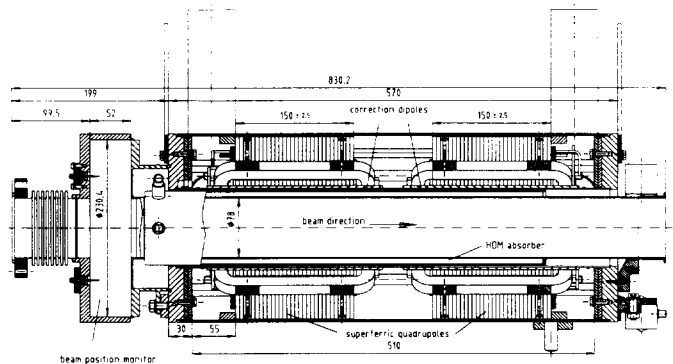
The superconducting magnet package. Dimensions in mm's.
